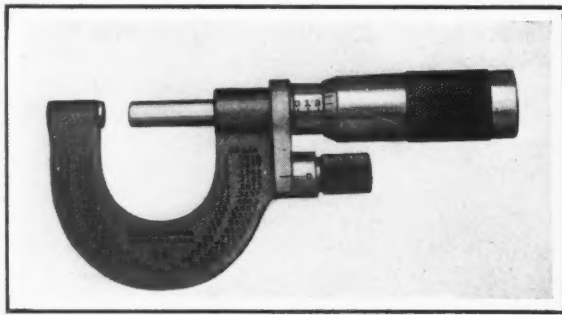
Brown & Sharpe Micrometer Caliper which Reads Direct to 0.0001 Inch
